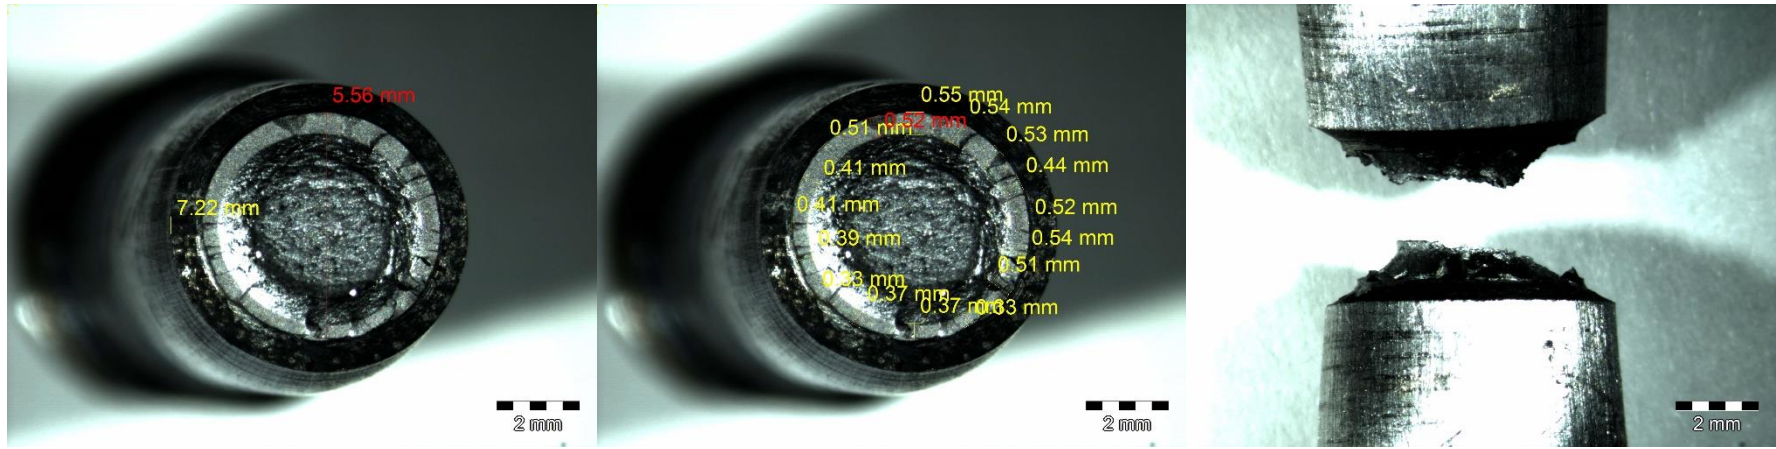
Cross-sectional and side view of fractured StxWSD-01
